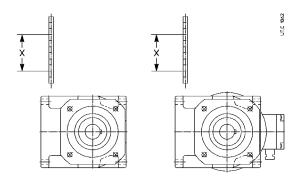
Position the gear reducer or gearmotor, mounting position B6 for the measurement of oil level (quantity).
